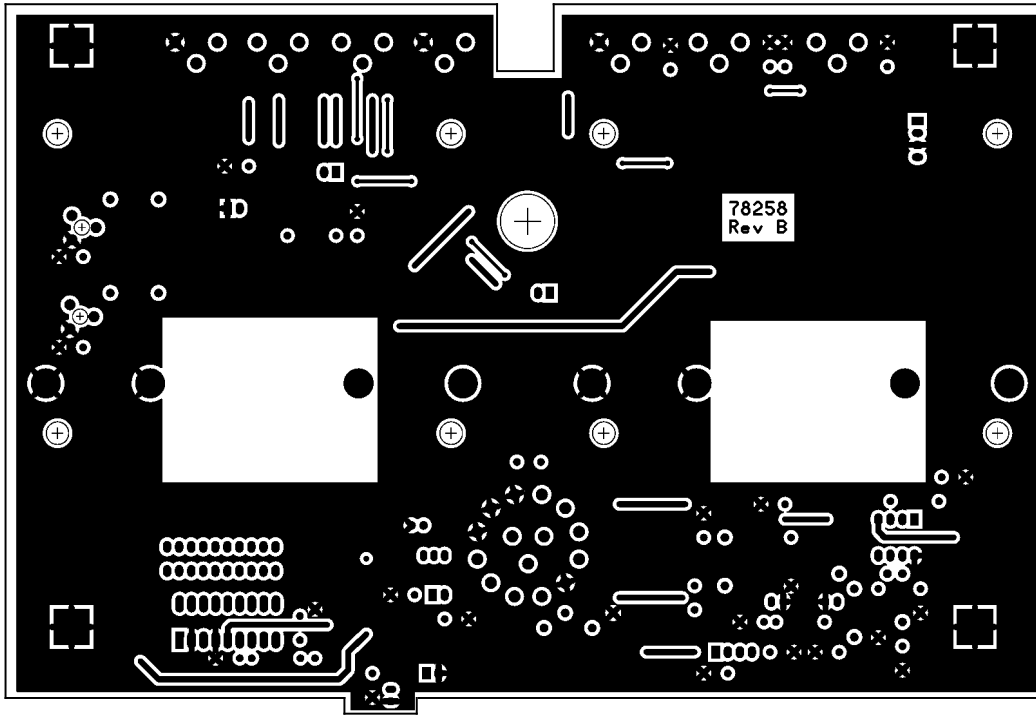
METER/SWITCH BOARD (ASSEMBLY A12) COMPONENT LAYOUT VIEWED FROM FRONT PANEL SIDE
